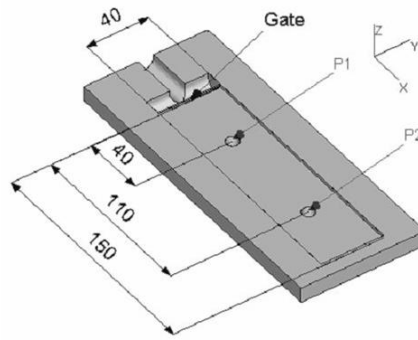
Moulding insert of injection moulding part with 2 mm of thickness (dimensions in mm).
